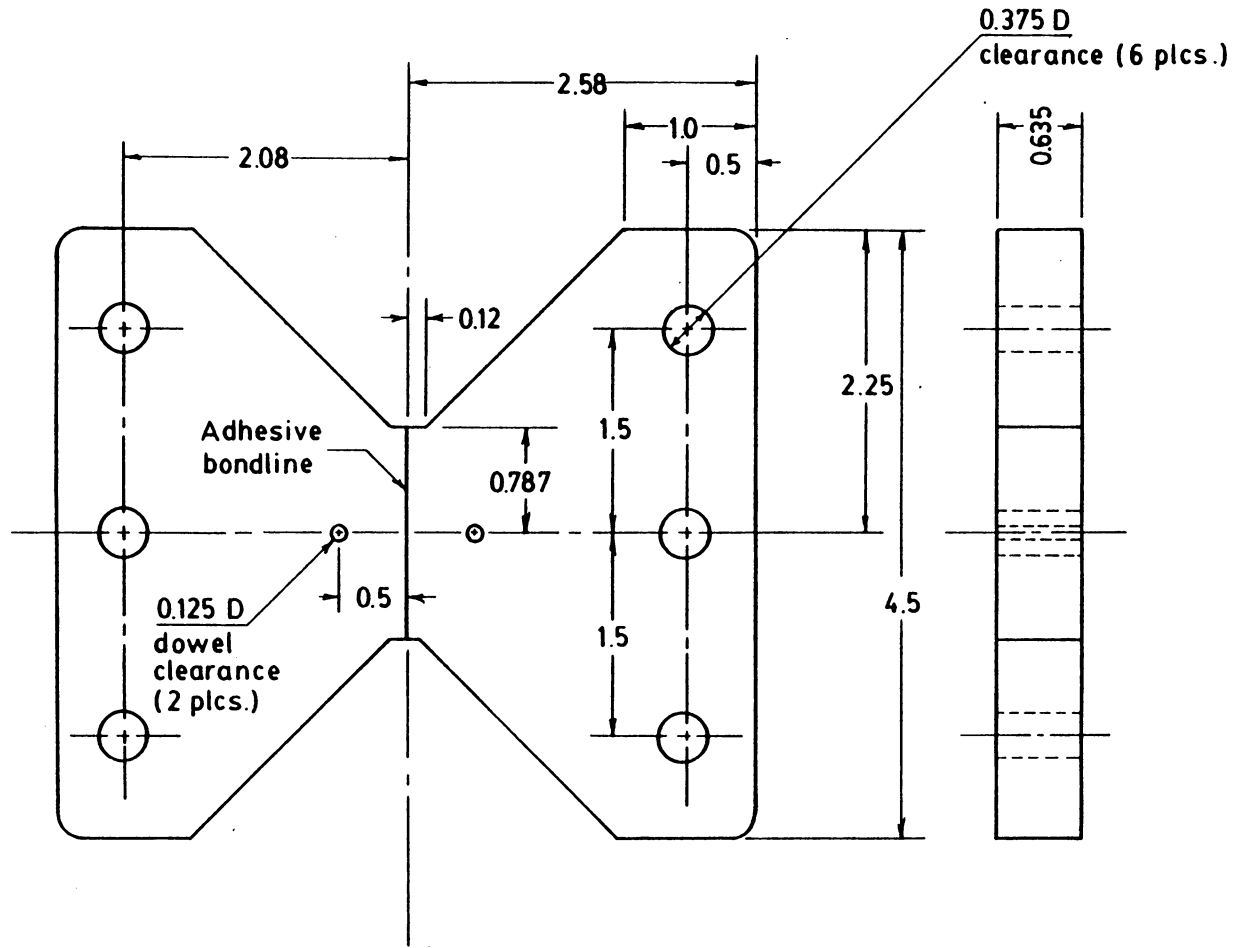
Arcan specimen with provisions for extensometer fixture: dowel clearances.
